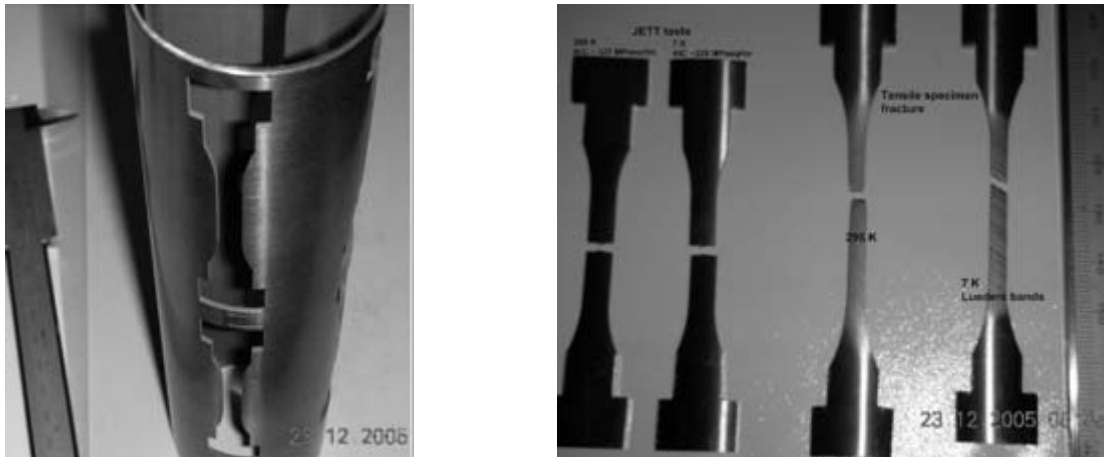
On the left the provided tube for tensile and JETT specimen. On the right the investigated tensile and JETT specimens at 295K and at 7K showing their fracture status.
